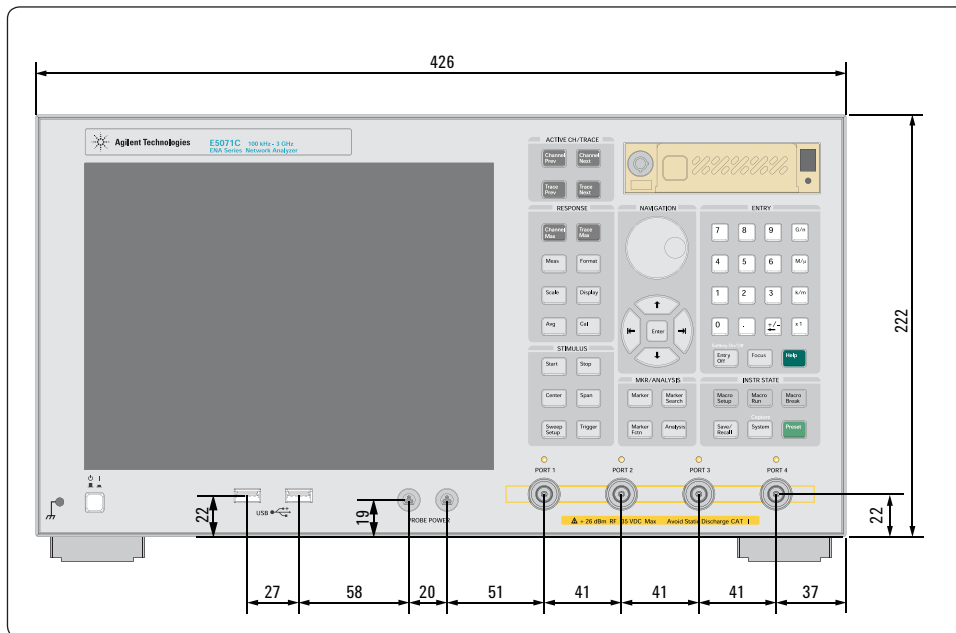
Dimensions (front view, E5071C with Option 430/435/440/445/460/465/480/485, in millimeters)
